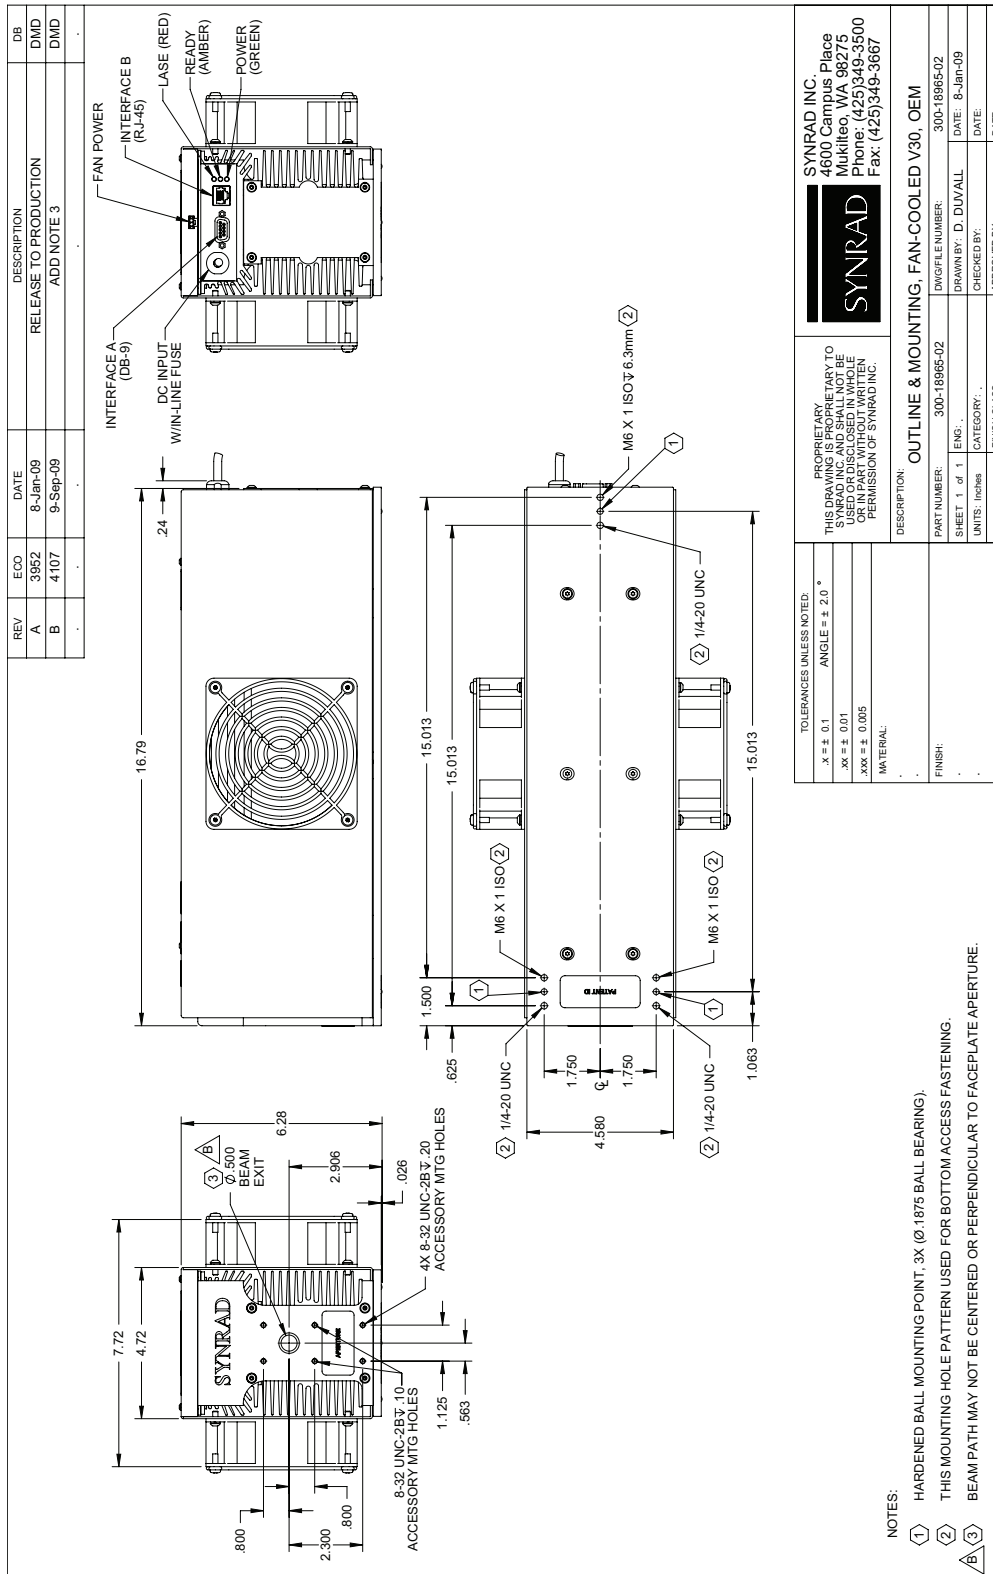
OEM v30 fan-cooled package outline and mounting dimensions
